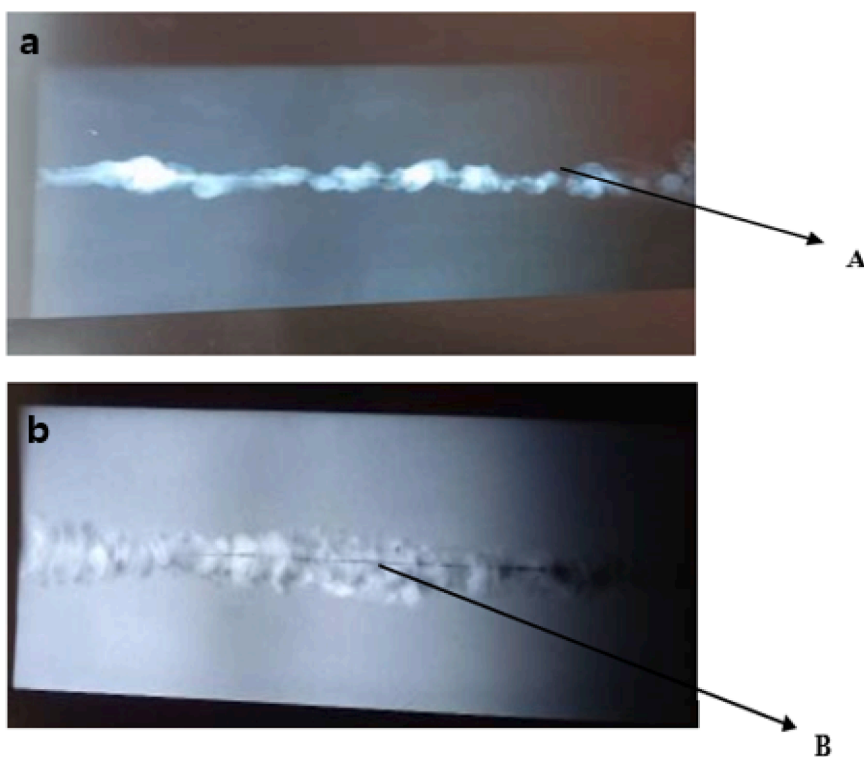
Images of developed film from (a) acetylene weld test piece (b) oxy-hydrogen welded test piece.
